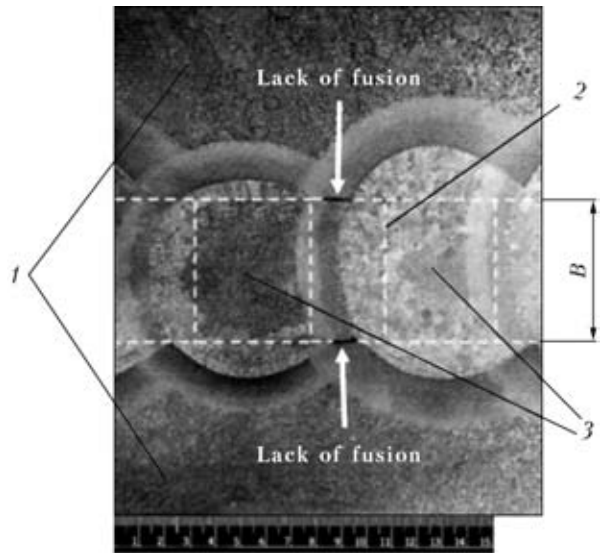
Transverse macrosection of a fragment of multilayer weld with defects: 1 – specimen pieces welded; 2 – shaping spacer plate; 3 – weld layers
